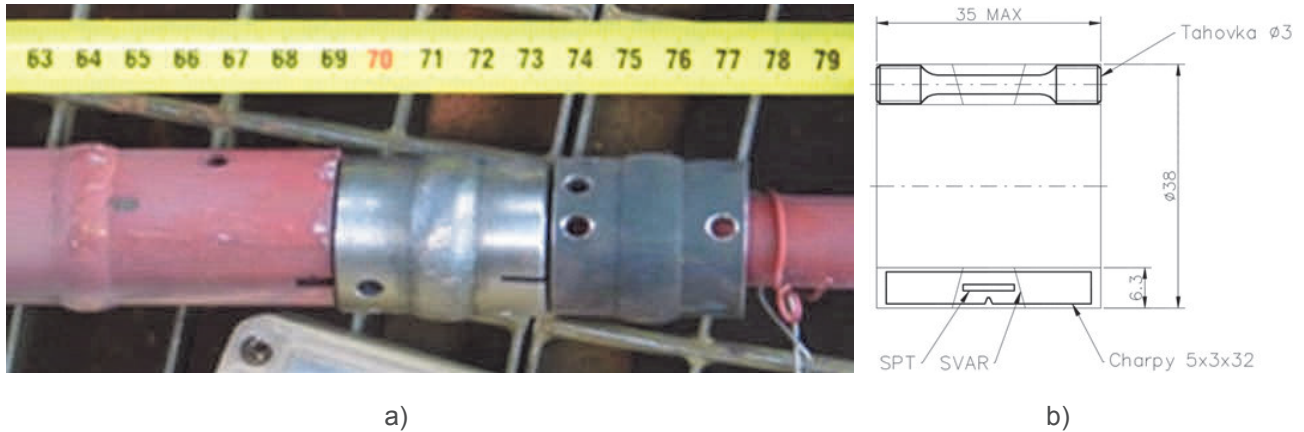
Samples of welded joints before exposure in the boiler
